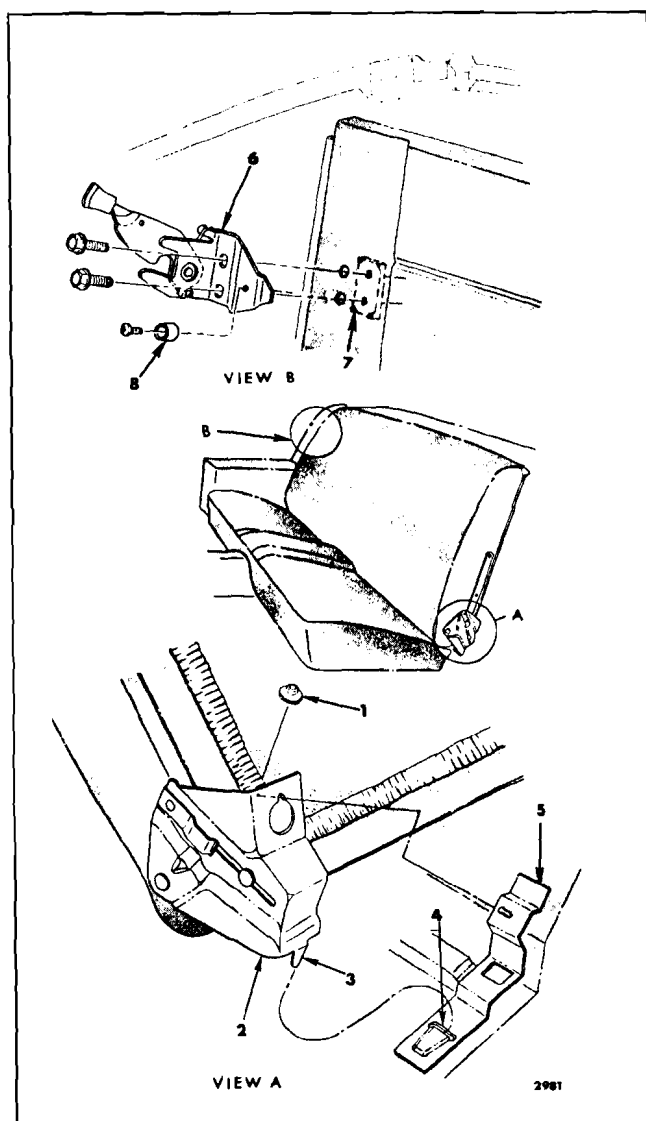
Folding Rear Seat Back Assembly - "F" Body Styles
